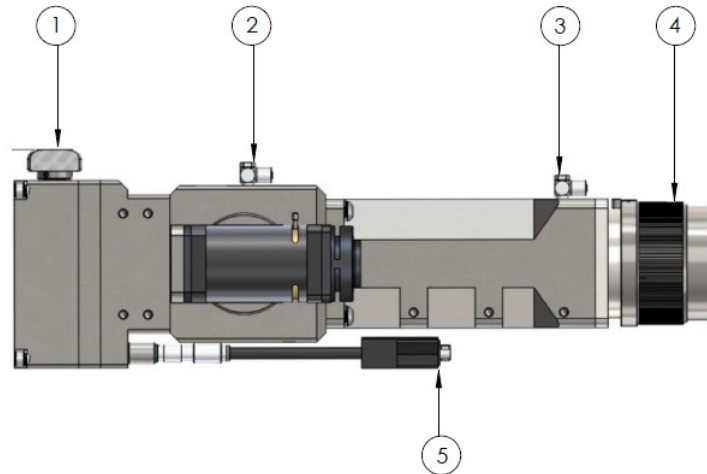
IPG Standalone D50 Laser Welding Head
